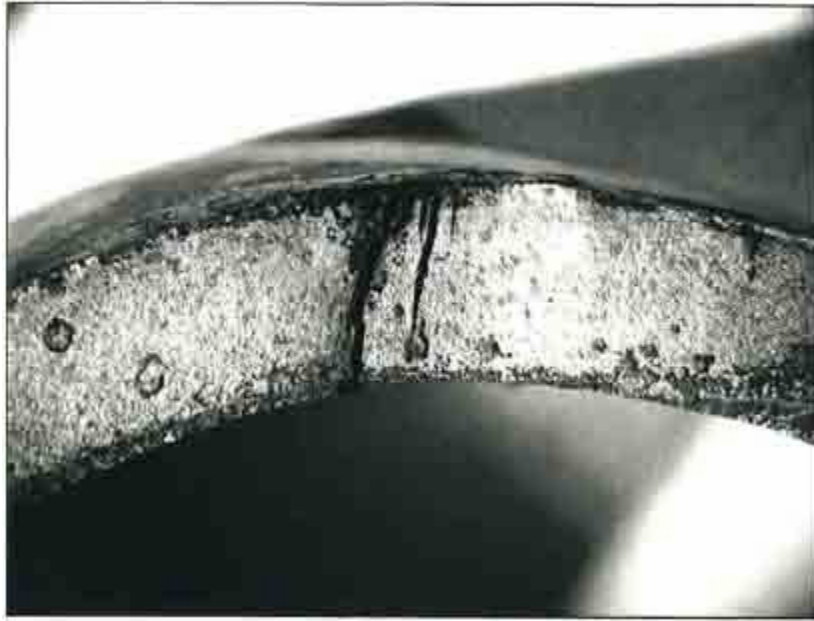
Photograph showing one of the mating fracture initiation sites.
